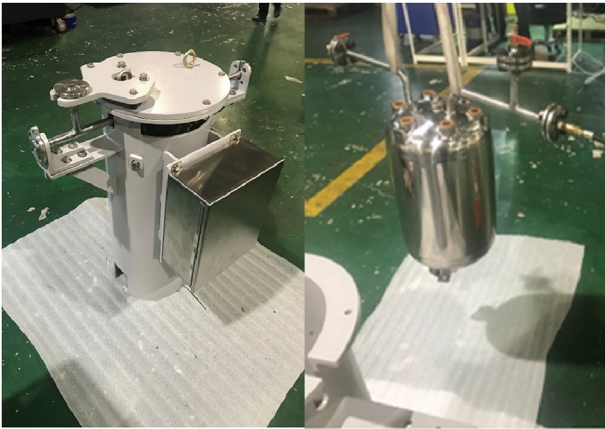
Image of sample assembly (left) and pressure vessel (right).
